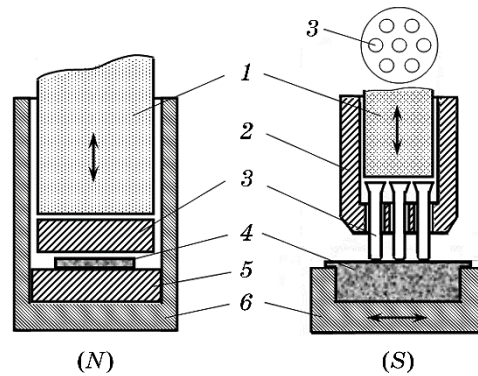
Ultrasonic impact treatment schemes: single-pin normal impact loading mode (*N*) and sliding/shearing multi-pin impact loading mode (*S*): 1—vibrating ultrasonic horn, 2—impact head, 3—pins, 4—sample, 5—bearing steel disk support, 6—sample holder.
